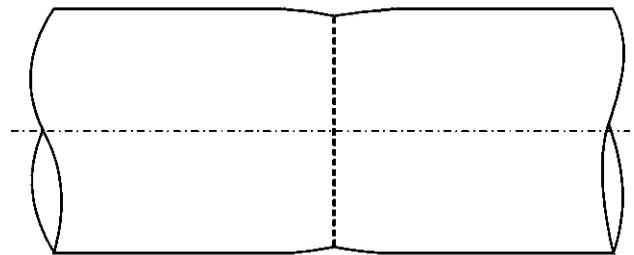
Geometrical imperfection in butt joint zone, caused by making the circumferential weld
